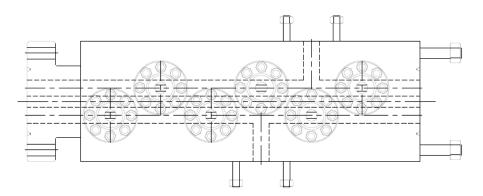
Single-string and Dual-string Multiple Valve Assemblies
